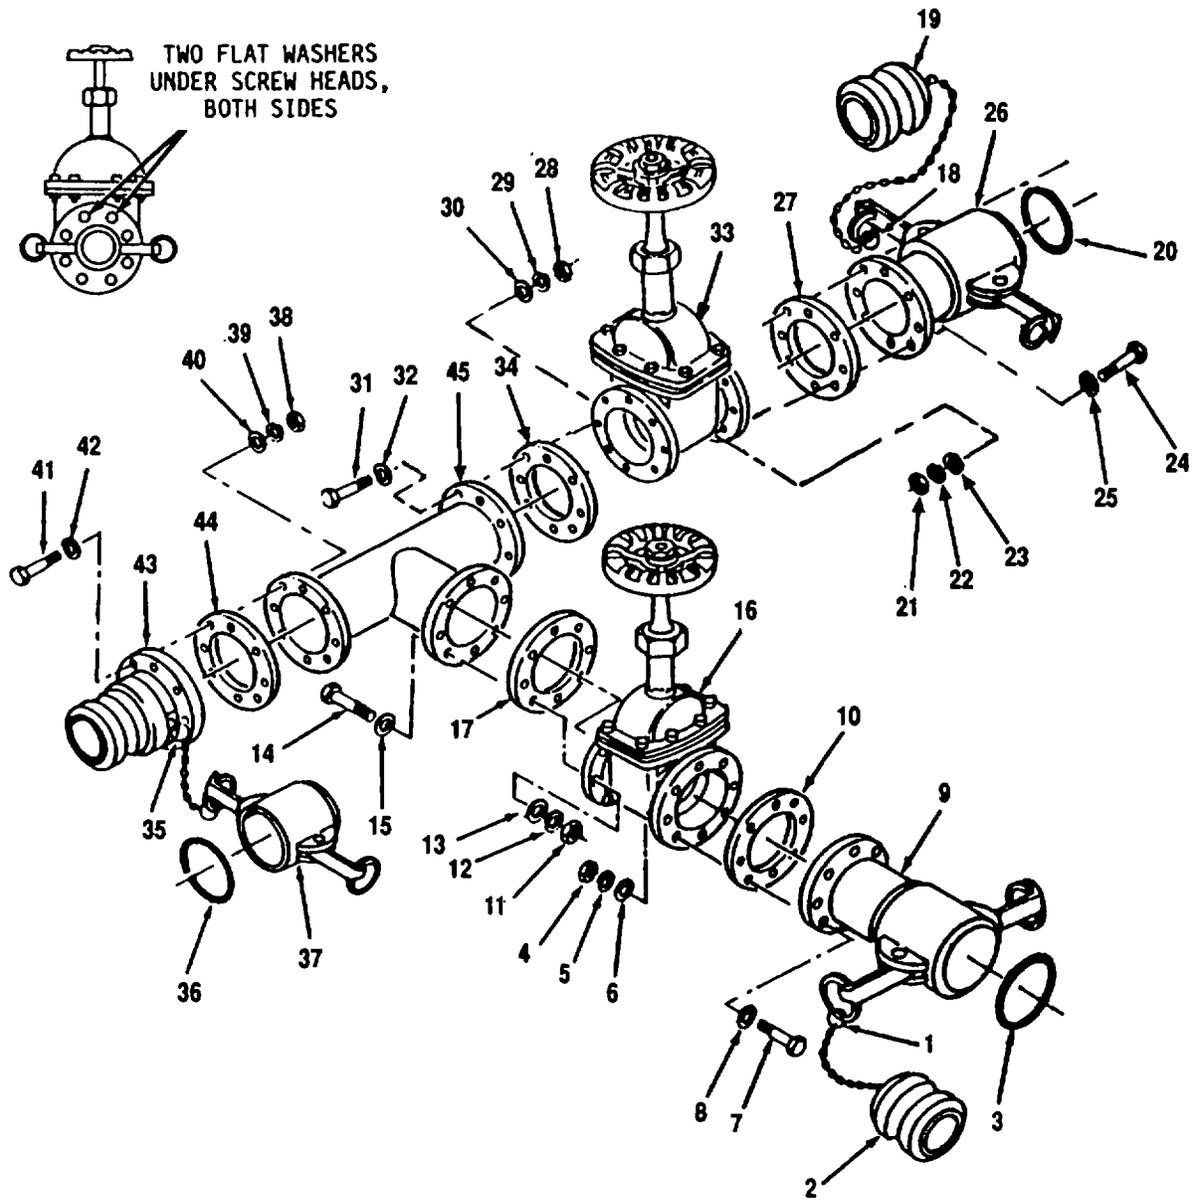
Tee and Dual Gate Valve Assembly (9148-Y1) Assembly
